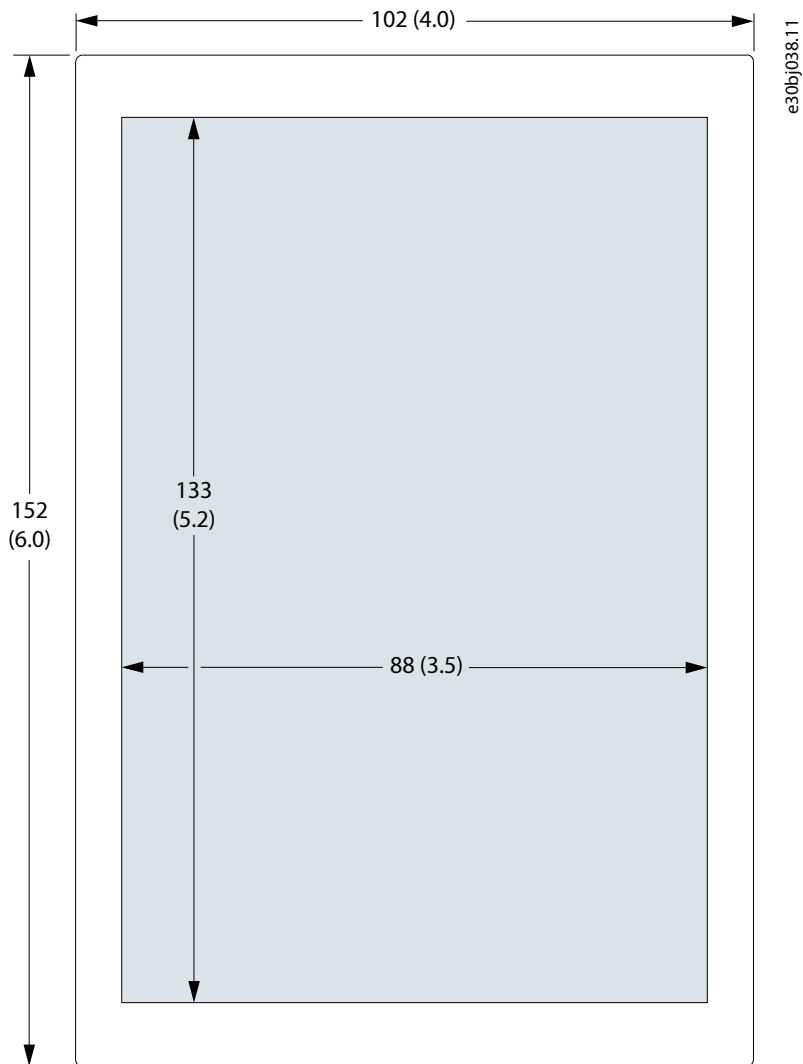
Flush Mounting Kit Drilling Template, mm (in)
